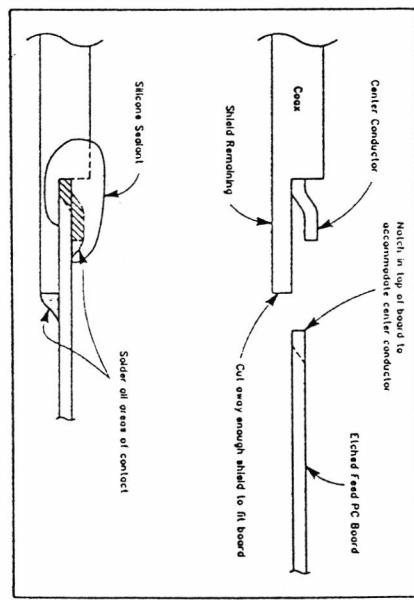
Prepare the hardware for mounting to the dish-feed PC board by cutting away half the shield and dielectric from the cable over a distance long enough to ensure a solid mechanical connection to the board. Then, bind the center conductor slightly and fit it into a notch in the PC board, as described in the text.
